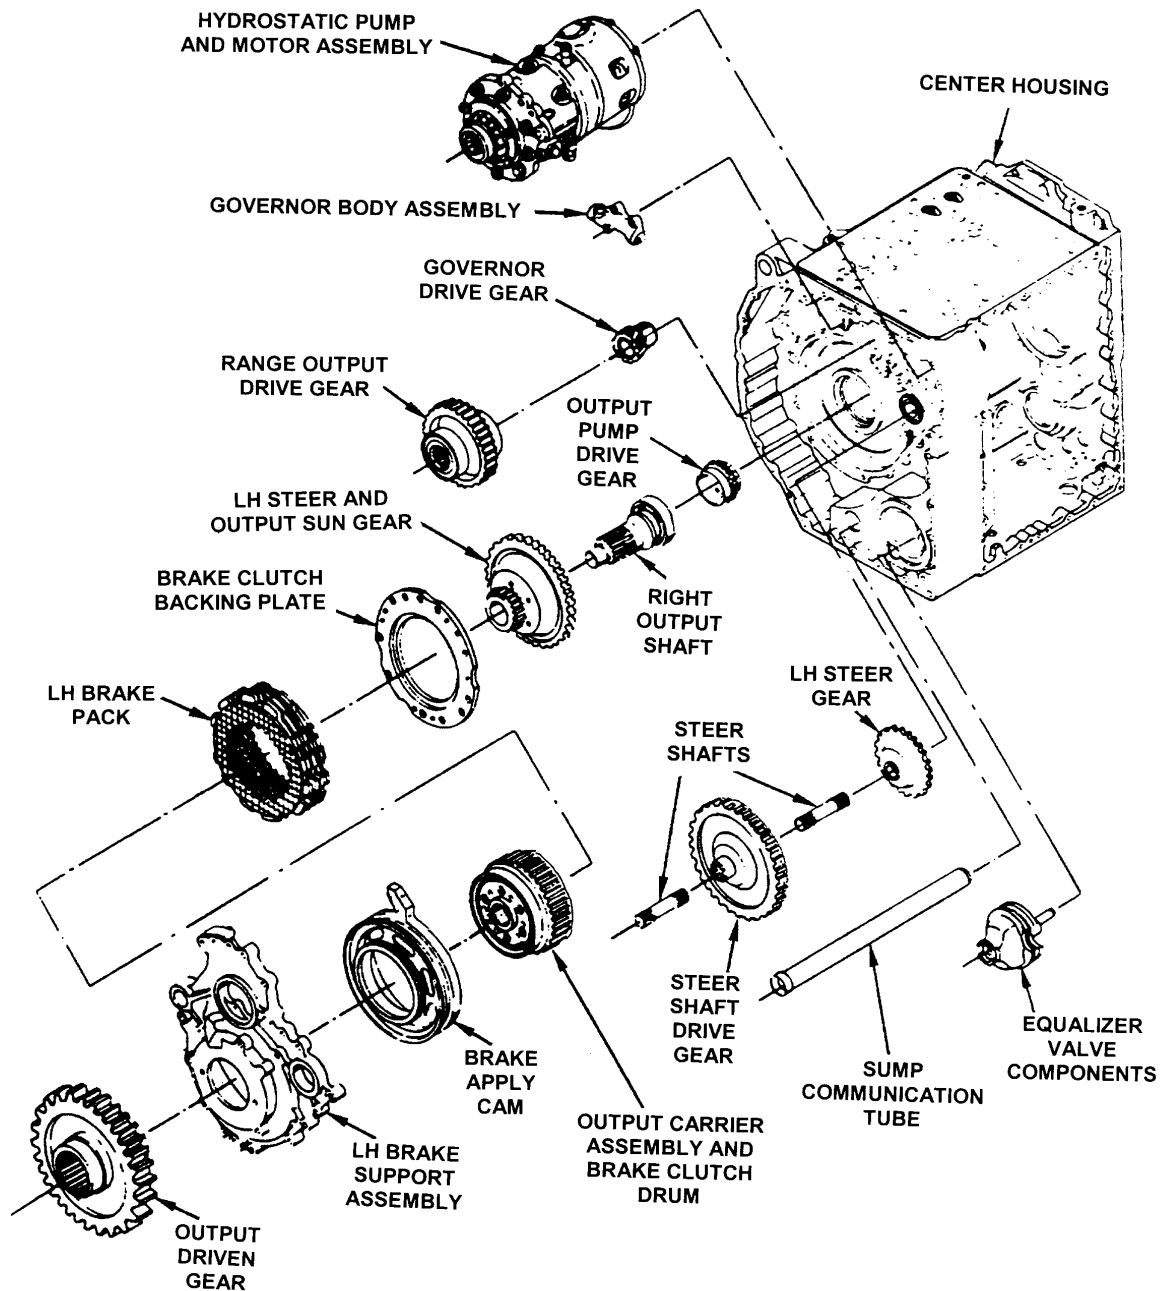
Exploded View of Major Components, Right Side of Center Housing Assembly.
